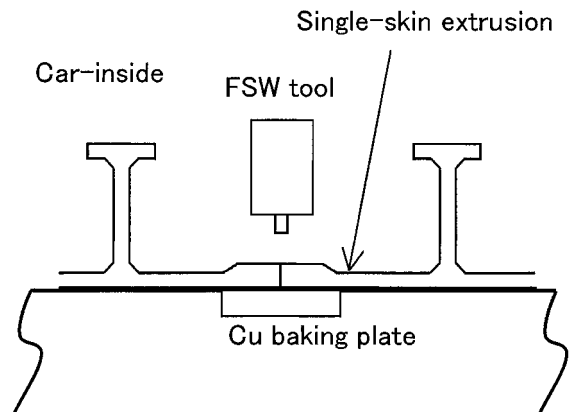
Welding procedure of single-skin extrusion by FSW.
